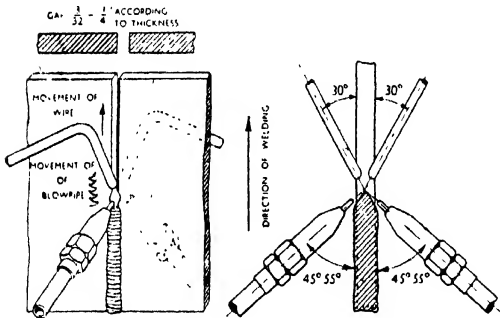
VERTICAL WELDING—TWO OPERATORS
